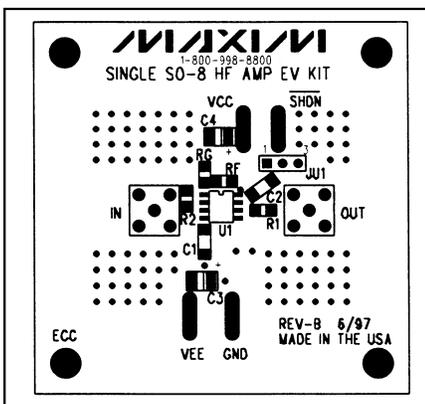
SO-8 High-Speed EV Board Component Placement Guide—Component Side
